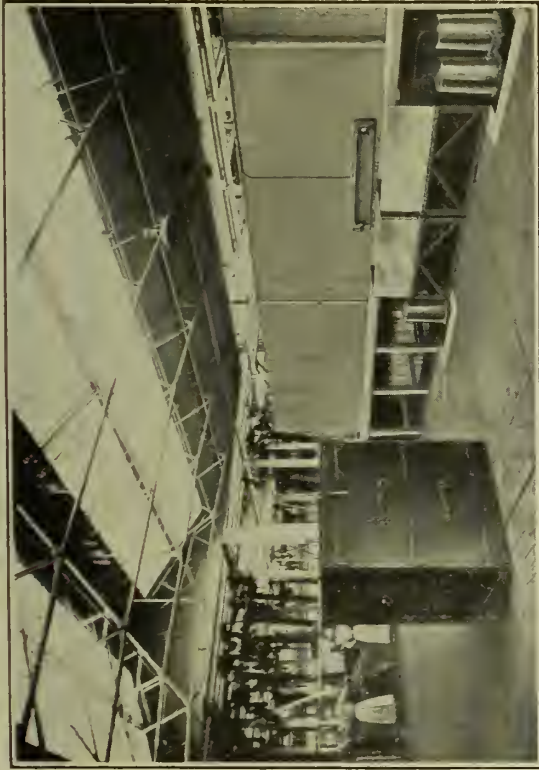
SHELL WASHING AND DRYING PLANT.
